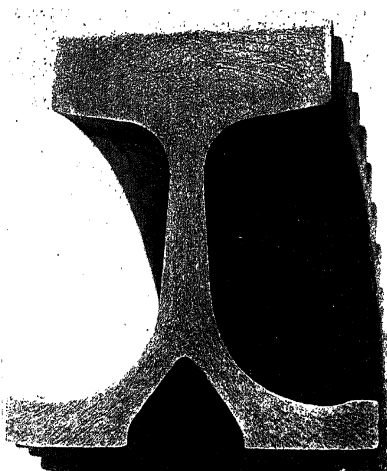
Macrostructure of Mercedes-Benz D.B. 601A airscrew shaft gear wheel.
